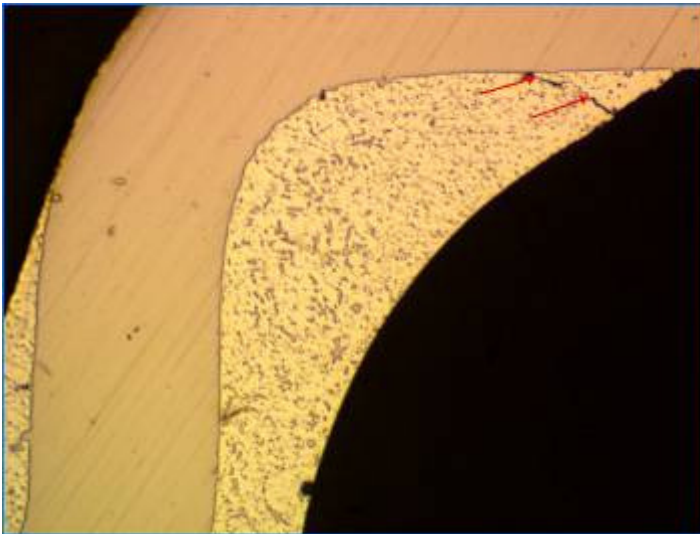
cross section, SN66, U61, left lead solder crack, 200xc
